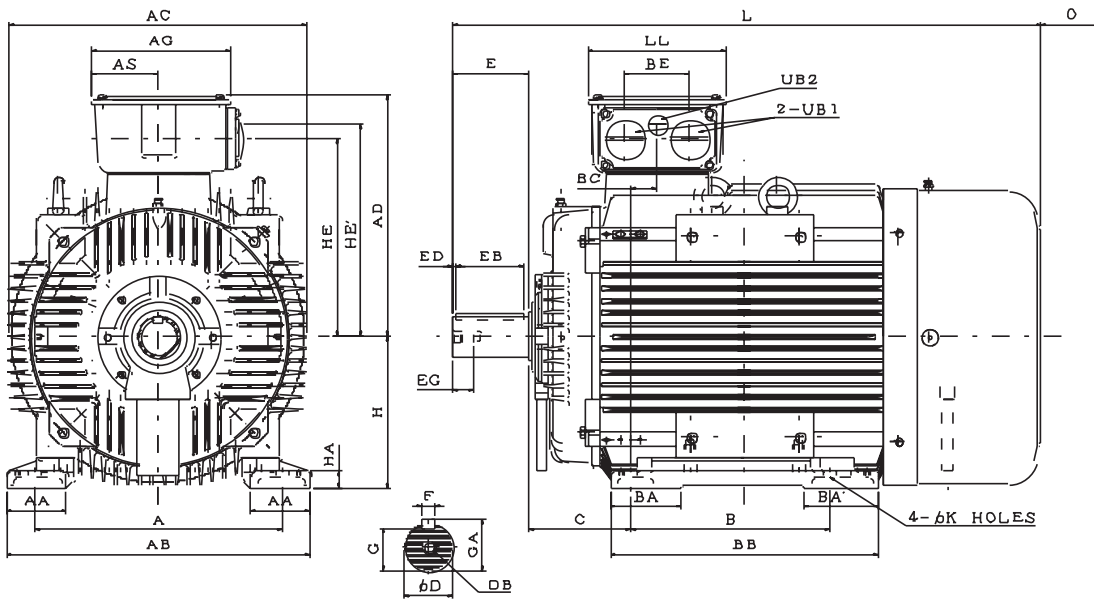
Outline drawing of cast iron design, feet version, mounting B3; frame size 280
